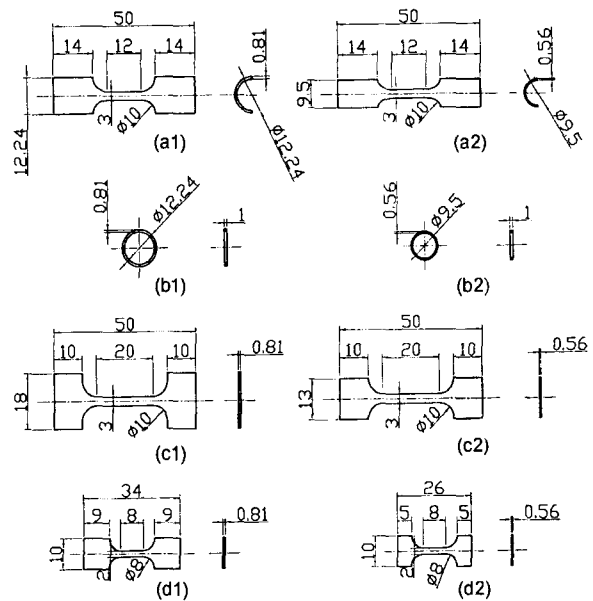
The geometry of specimens: Zircaloy-2 with suffix (1), Zircaloy-4 and Zirlo with suffix (2); (a)Original Longitudinal specimen (b)Original Transverse specimen (c)Flattened Longitudinal specimen (d)Flattened Transverse specimen (unit : mm)
